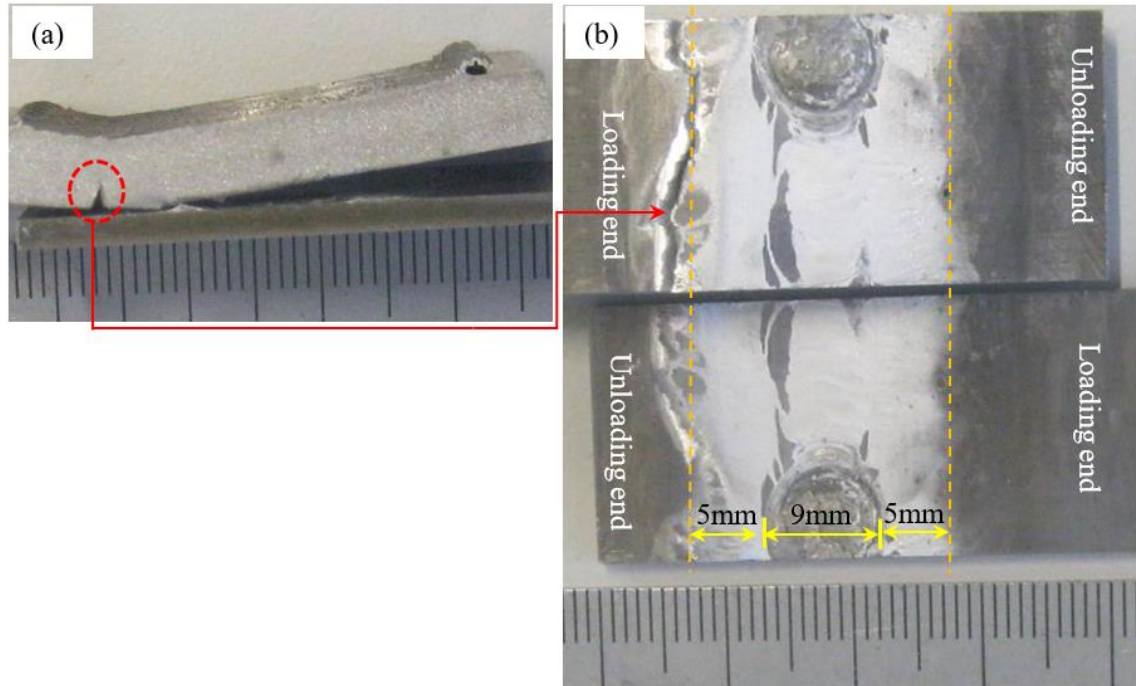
Actual photograph of fractured surfaces: (a) Side view of a fractured weld sample, (b) Top view of the fractured weld sample, showing crack outside the 5 mm away from the end of tool pin diameter ($D_{pin} = 9$ mm).
